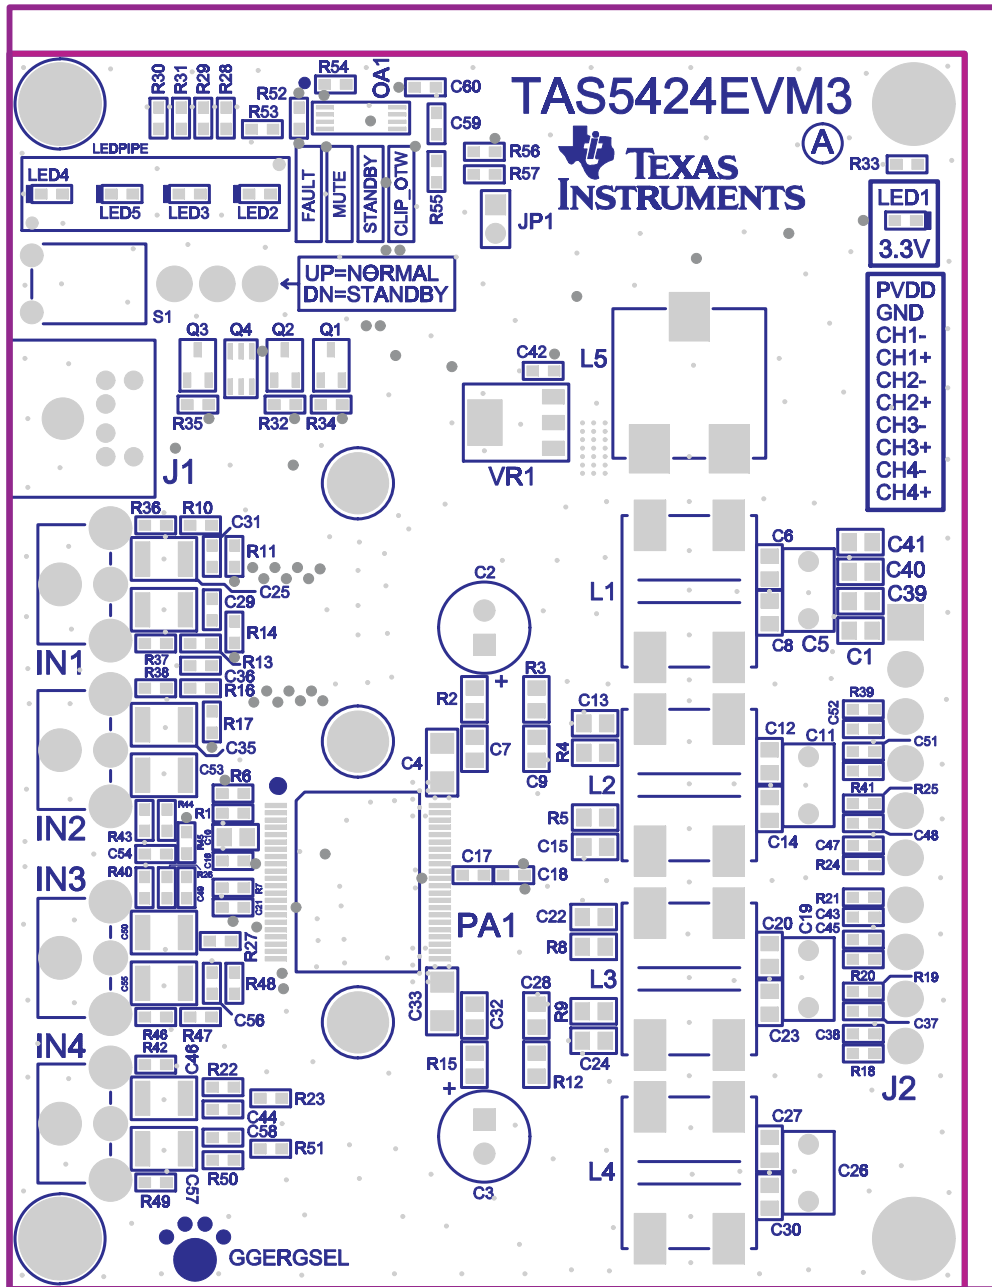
TAS5424AEVM3 Top Assembly Layer
